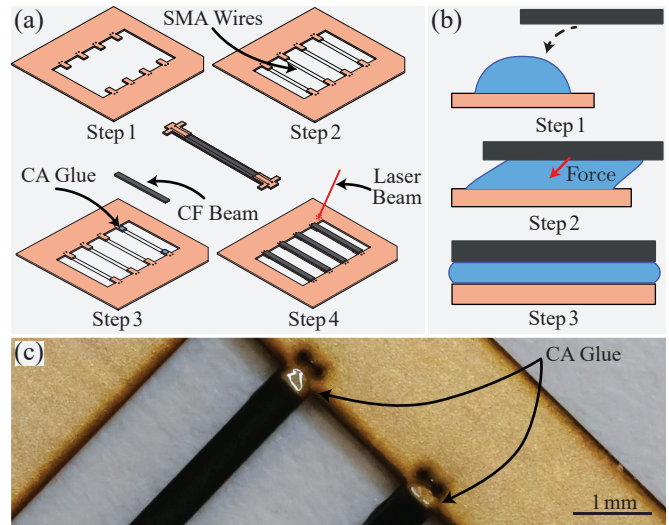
Fabrication of the proposed SMA-based actuator. (a) Steps of the SCM-based fabrication procedure. In Step 1, a 3-W 355-nm DPSS laser (Photonics Industries DCH-355-3) is used to micromachine the Cu-FR4 supporting frame employed during fabrication. In Step 2, SMA wires are looped through holes in the frame, and secured under tension with a simple knot and a small amount of CA glue (Loctite 401). In Step 3, we use capillary self-alignment to accurately place four CF beams onto premachined alignment tabs of the Cu-FR4 frame. In Step 4, the actuator is released from the Cu-FR4 frame using a 3-W 355-nm DPSS laser. (b) Capillary alignment used in Step 3 of the actuator fabrication process. In Step 1, droplets of CA glue are precisely placed onto alignment tabs of the Cu-FR4 frame, and four CF beams are immediately placed on top of the droplets. In Step 2, each beam is pulled, without external intervention, in the desired direction of alignment due to the surface tension of the glue and capillary action at the beam-glue interface. In Step 3, the CA glue cures and the CF beams become precisely aligned over the tabs of the Cu-FR4 frame. (c) Photo showing two cured CA glue droplets and two precisely aligned beams after completion of Step 3 in the actuator fabrication process.
